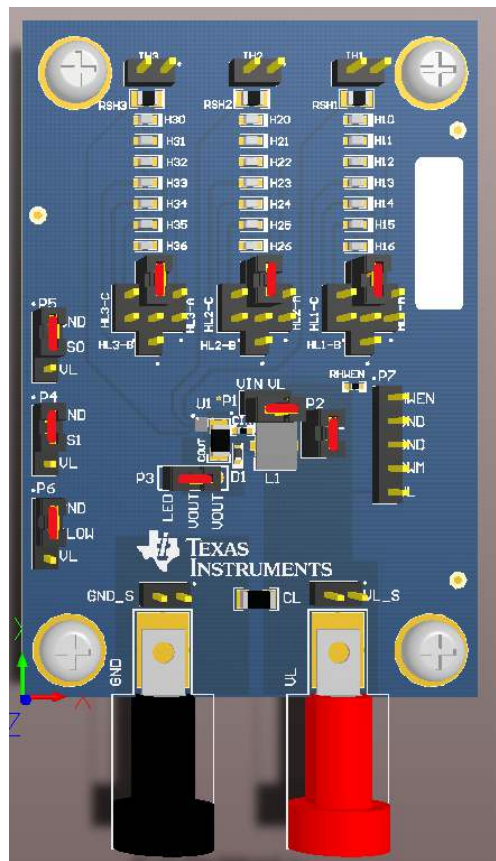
HL1A-C, HL2A-C and HL3A-C Star Jumper Configuration Settings (Blue Line Indicates Jumper Position)
